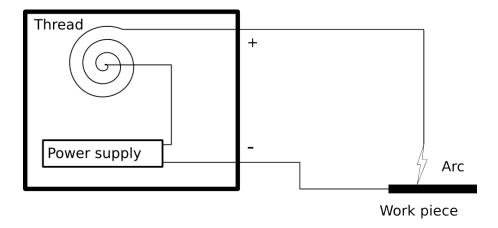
Simple diagram of the welding process for GMA-Welding
